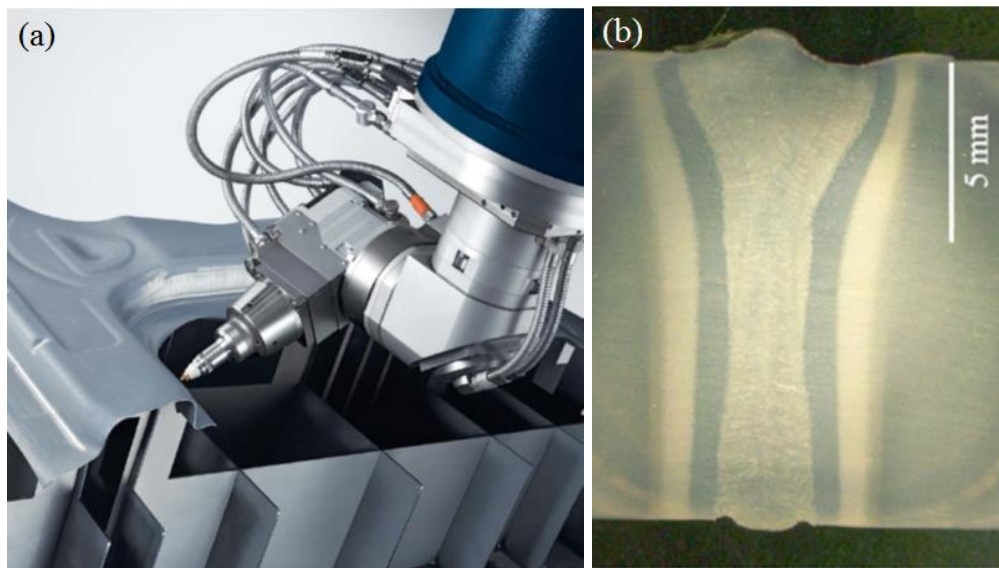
A laser welding application (a) [25] and ALW weld bead (b) [26].
